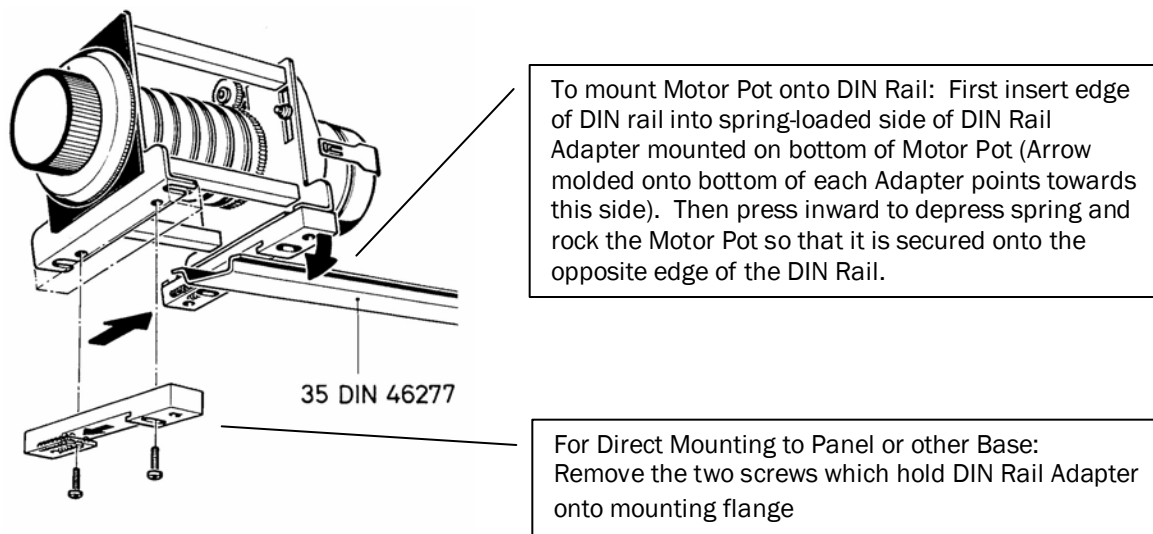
Direct and DIN Rail Mounting Options for Motor Pots.
